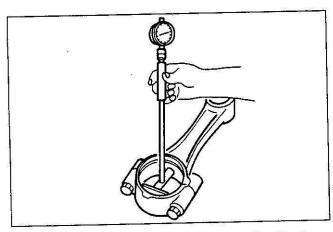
Measuring the Connecting Rod Bearing Inside Diameter
